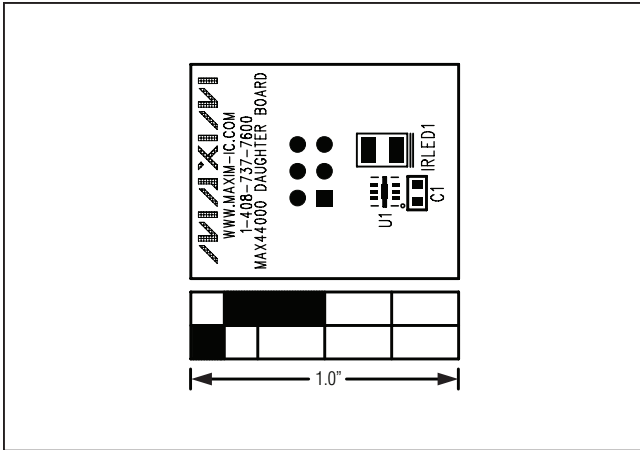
MAX44000 Daughter Board Component Placement Guide—Component Side
